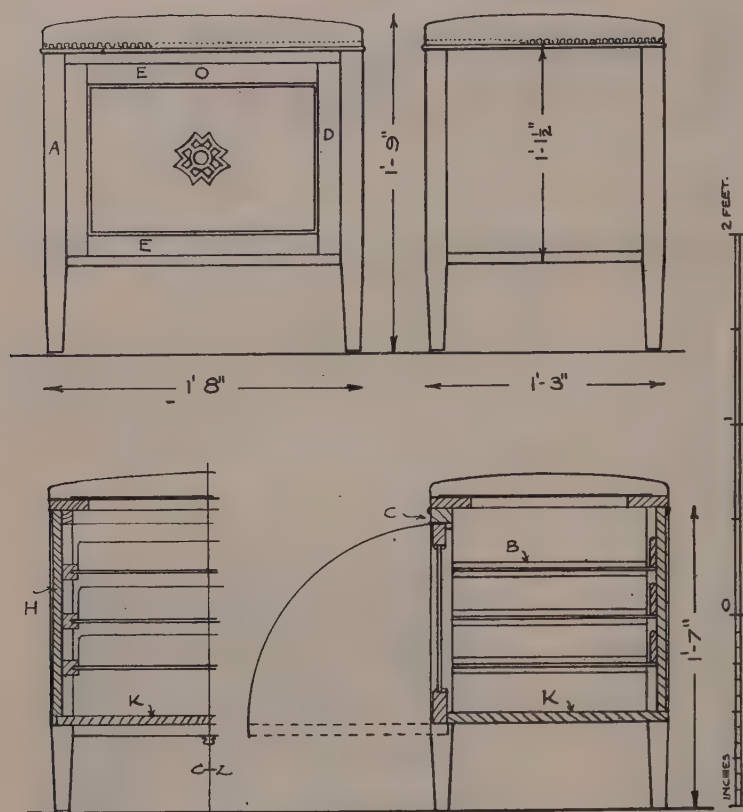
ELEVATION AND SECTIONAL VIEW, WITH SCALE.
